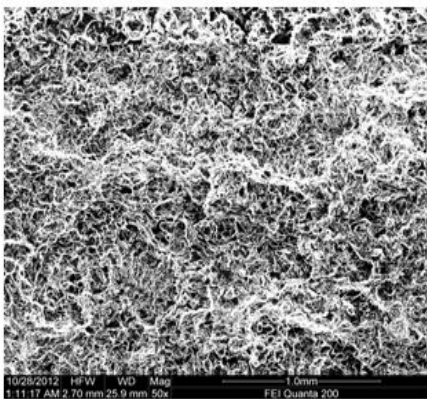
SEM photograph of fractured specimen in fracture toughness test (copper chilled matrix alloy)
